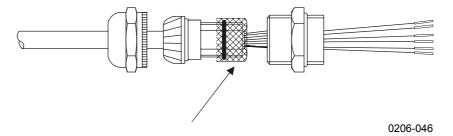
Cable Shield Bent over the Plastic Sleeve and O-ring
